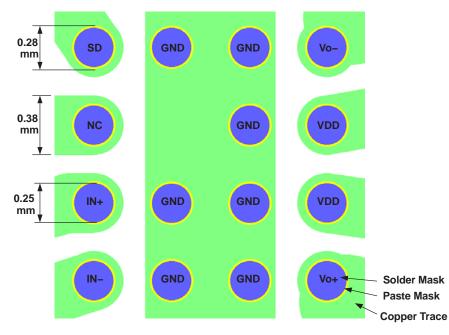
TPA2005D1 MicroStar Junior BGA Board Layout (Top View)
